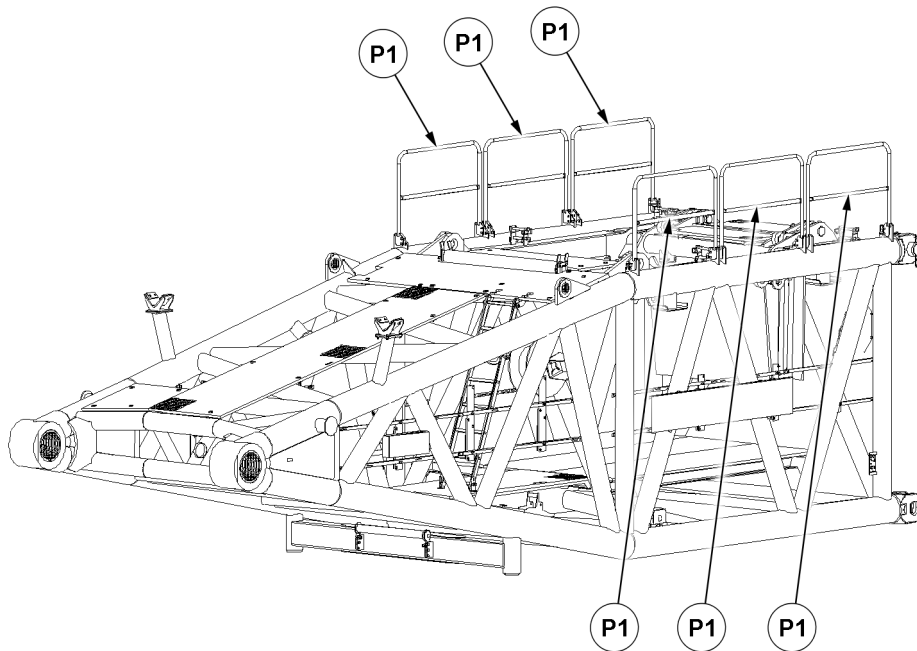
Fall protection equipment on the boom pivot sections and on the lattice sections — railing positions
